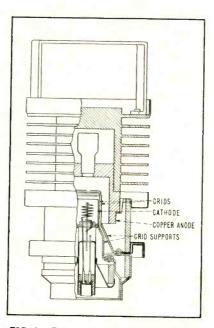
Cut-away view of GL-6283, 250watt uhf driver
